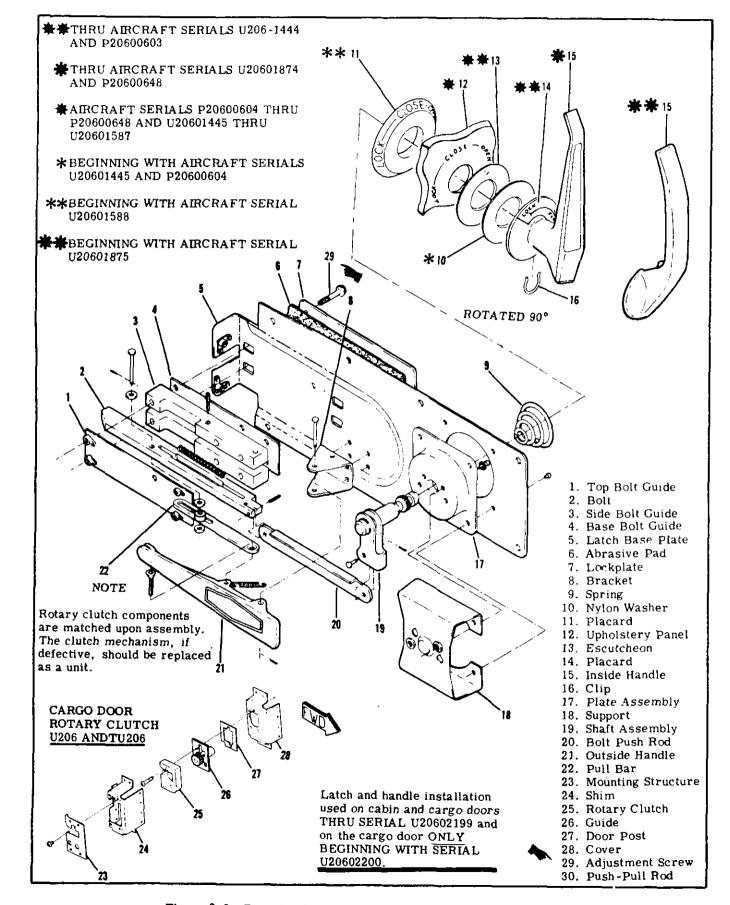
Door Latch and Rotary Clutch Components (Sheet 1 of 2)
